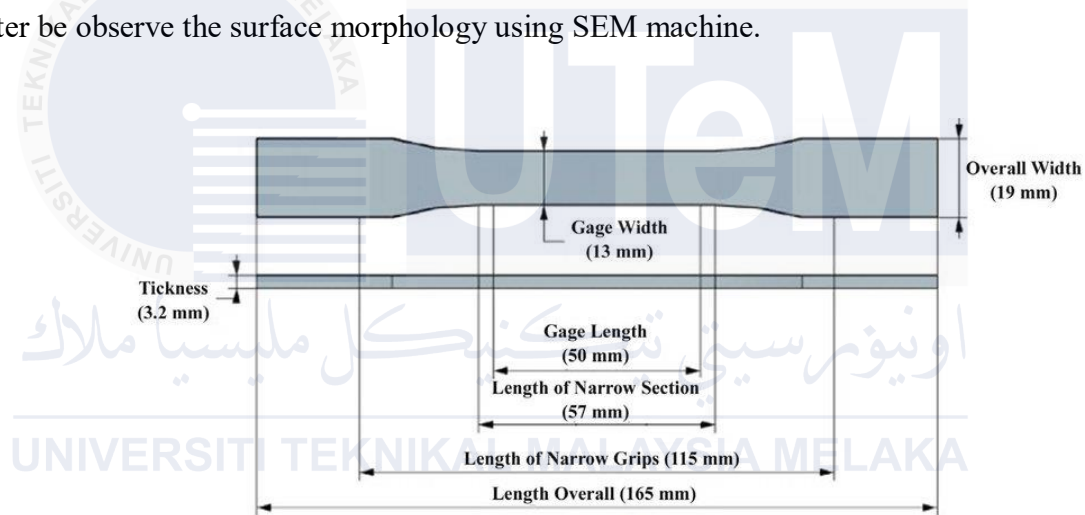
ASTM D638 Dimension for the tensile testing sample
